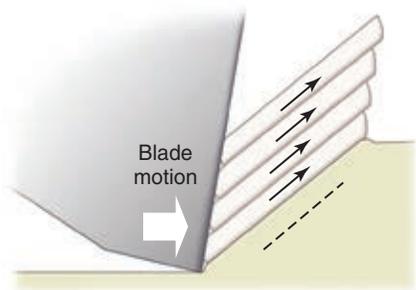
Schematic representation of bur blade (*end view*) cutting a ductile material by shearing mechanism. Energy is required to deform the material removed and produce new surface.
